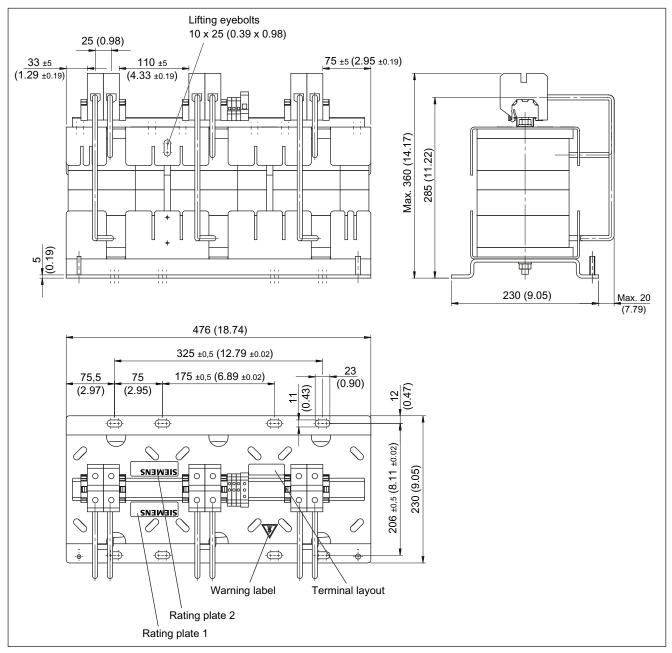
Dimension drawing of HFD line reactor 120 kW, all dimensions in mm and (inches)
